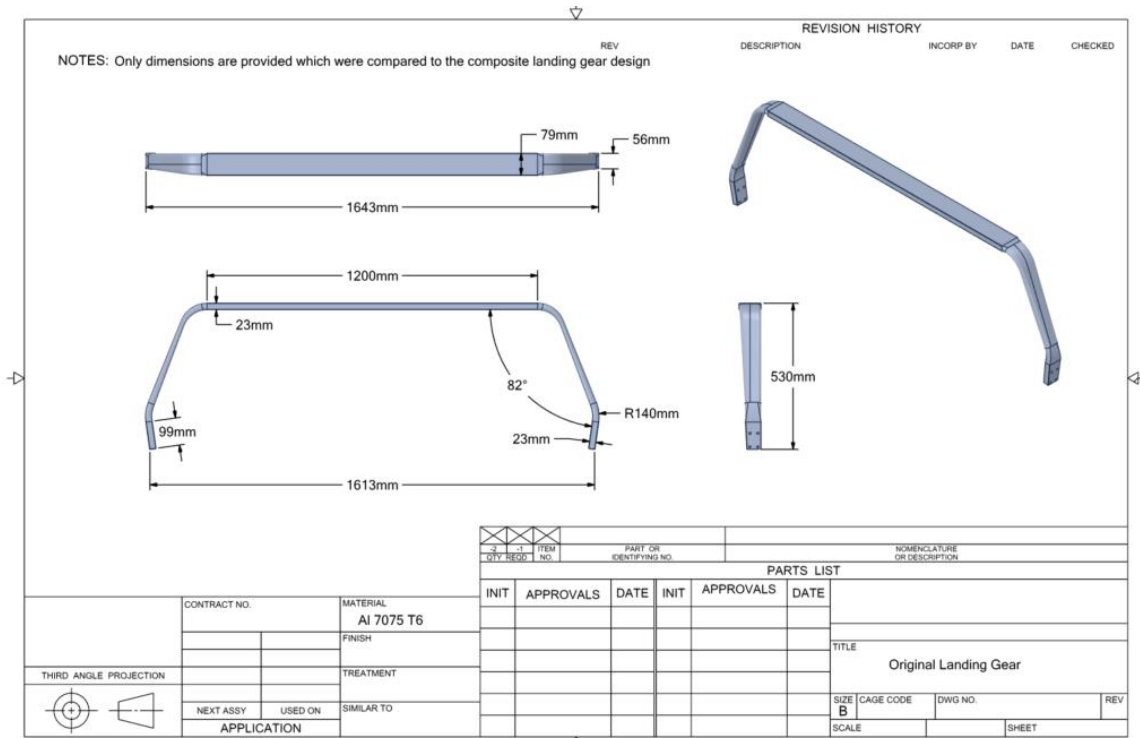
Aluminium 7075 T6 Alloy Landing Gear Dimensions Drawing
